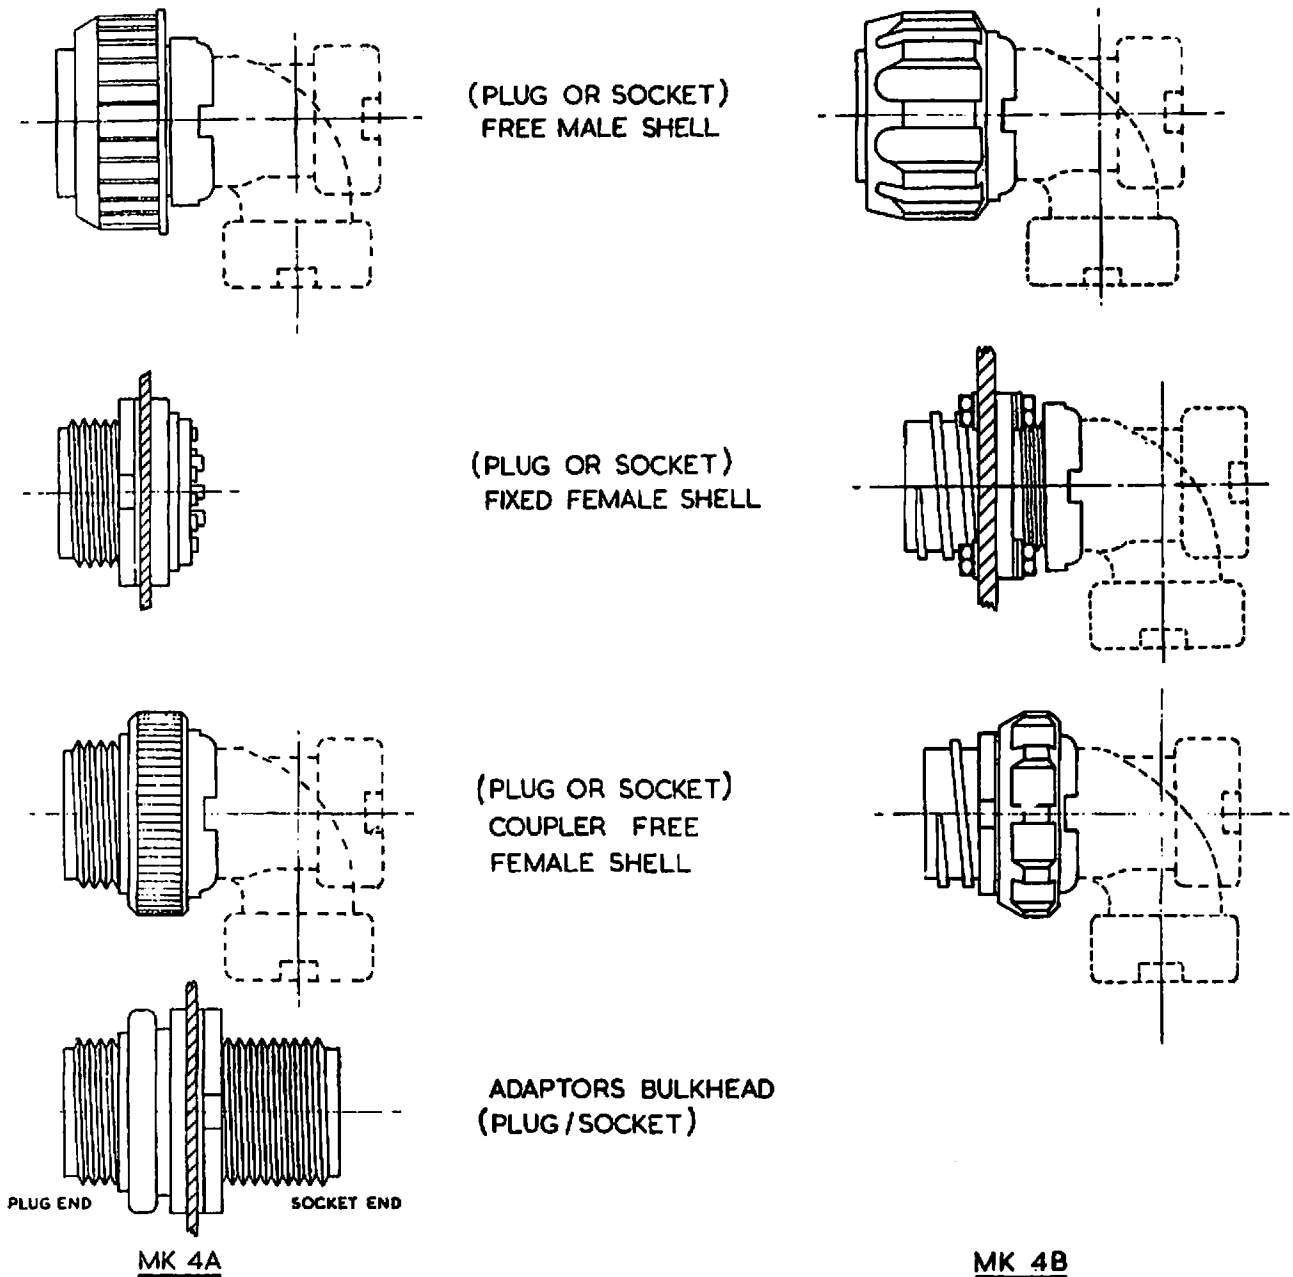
Types of Mk 4A and Mk 4B plugs and sockets
